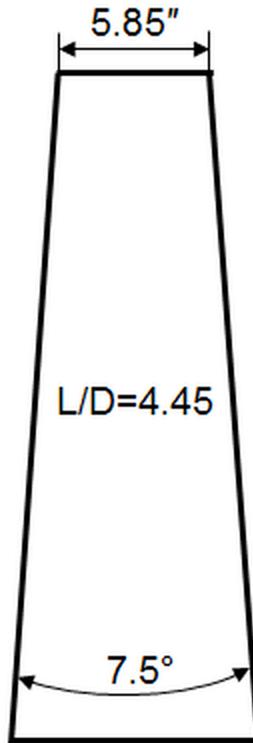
Dimensions of Discharge Tube Used in Palde's Experiment
